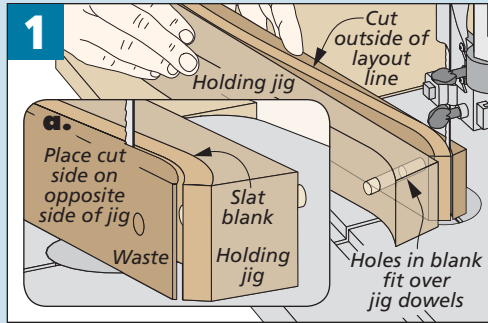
illustrates how a two-sided holding jig secures the slat blank on a pair of dowels. After cutting what will become the top side of the slat, move the blank to the opposite side of the jig. Cut the bottom profile of the slat before sanding it smooth with the same jig (Figure 2).
